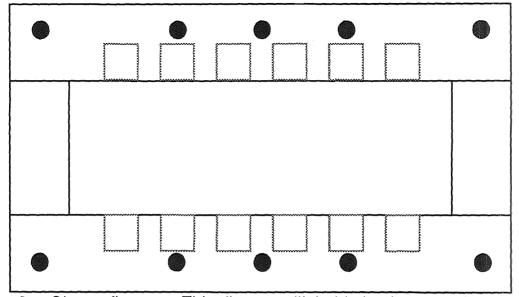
Clamp fixture. This fixture will hold the bars at the appropriate spacing for welding. There are only two critical dimensions, the 6 mm spacing of the samples, and the 3 mm separation distance between each half.
